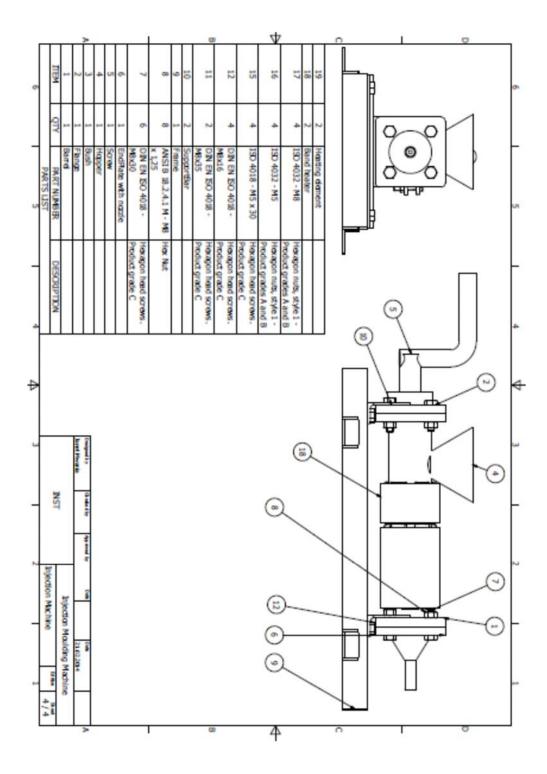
The Injection Machine Parts List on the End elevation and a front elevation (see table A for parts list).
